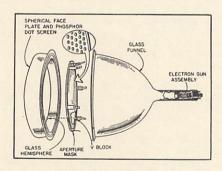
C - Exploded View of CBS Colortron Showing its Internal Components
